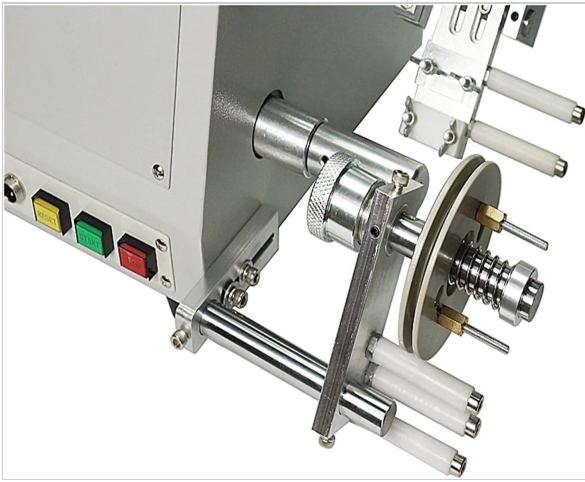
Close-up of the winding spindle and wire guide assembly, illustrating the precision components involved in the winding process.
